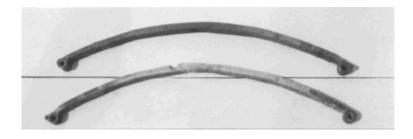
Composite leaf springs manufactured by hand lay-up vacuum bag process. (Source: Al-Qureshi 2001)
